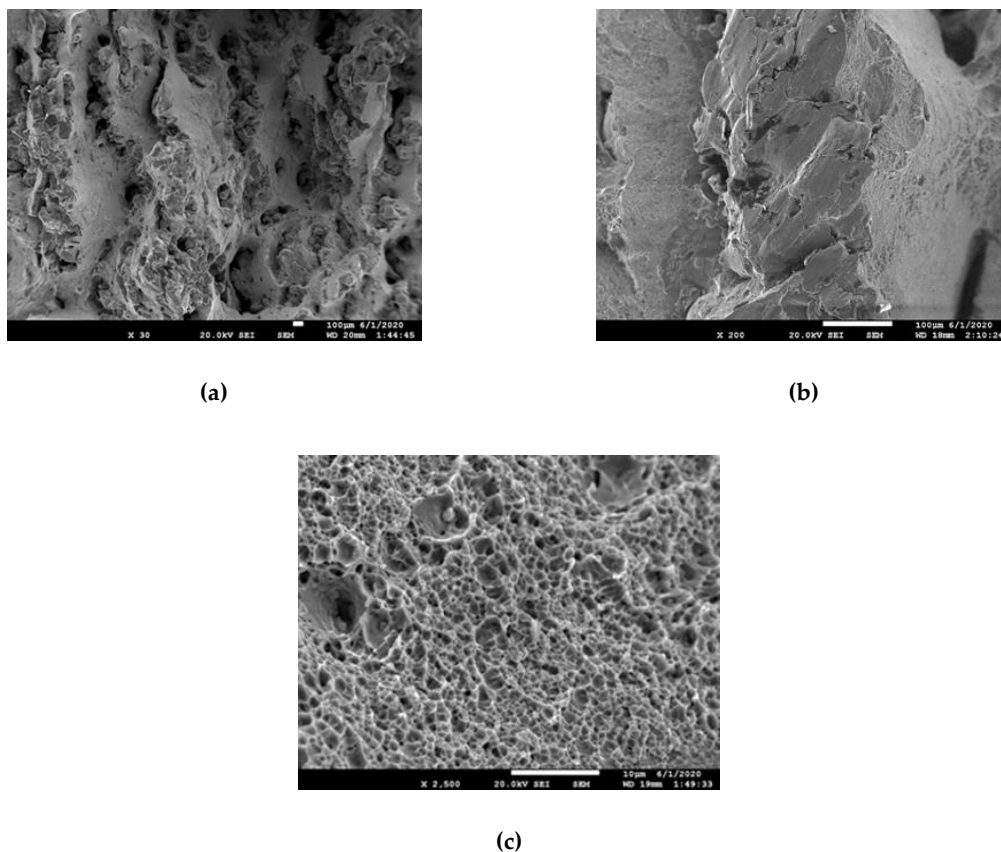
The fractured surface of the Hexagonal Family 1 (Samples 19-21)
